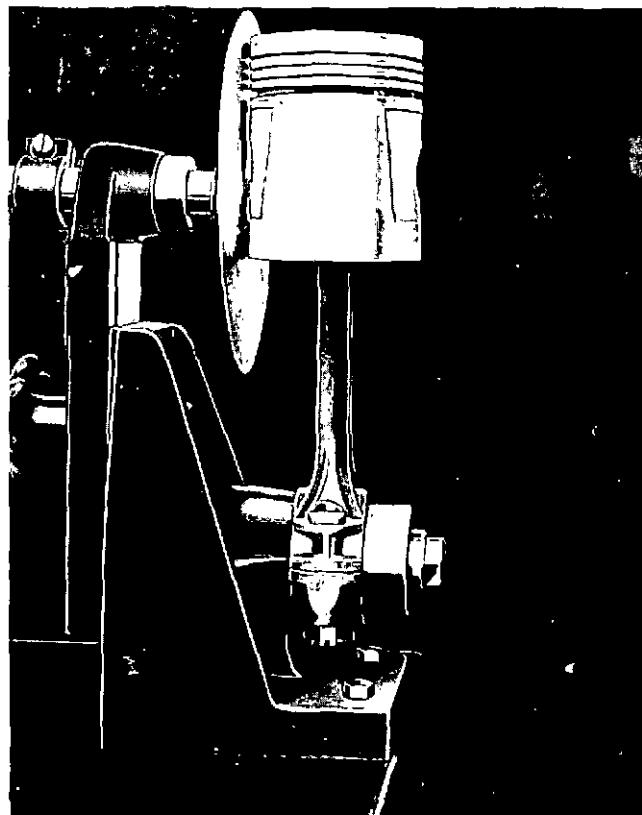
Checking Connecting Rod Assembly for Squareness and Twist
